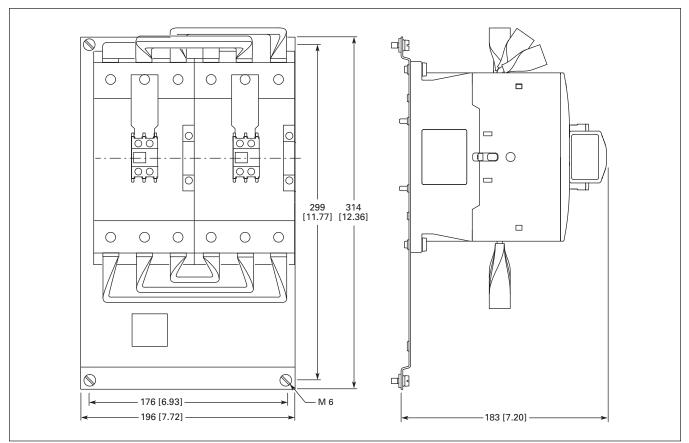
XTCR Reversing Combination Frame F – G — Approximate Dimensions in mm [in]
